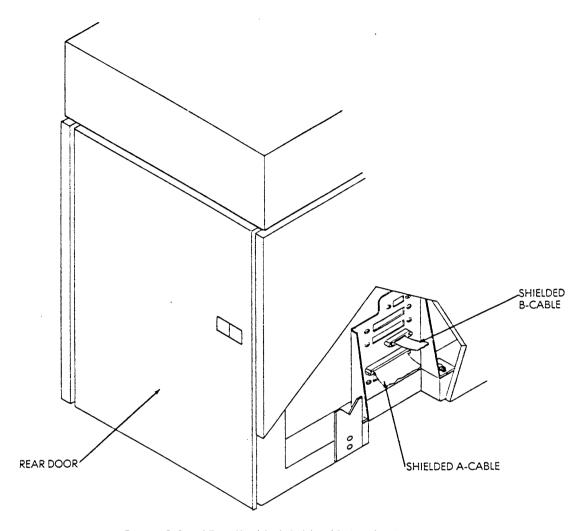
9766 Shielded Cable I/O Bracket Location
